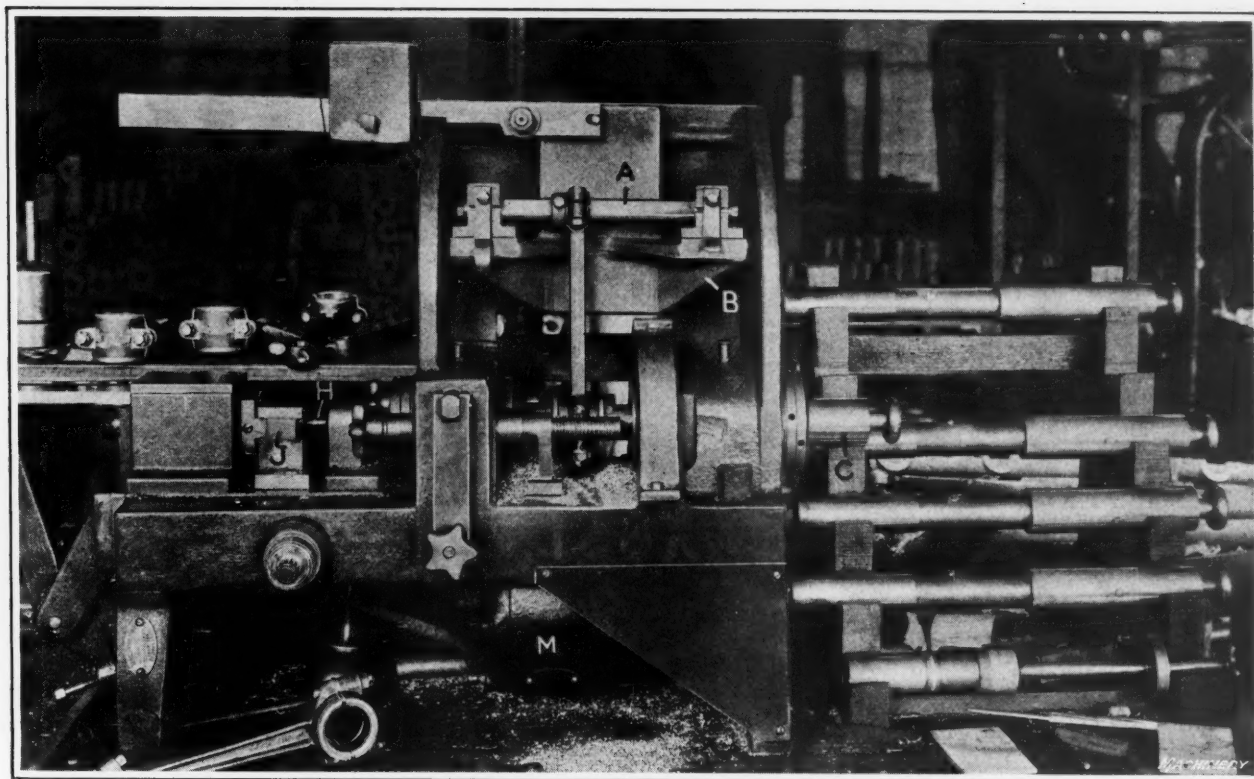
Special Machine used for finishing Main Bearings of Connecting-rods
